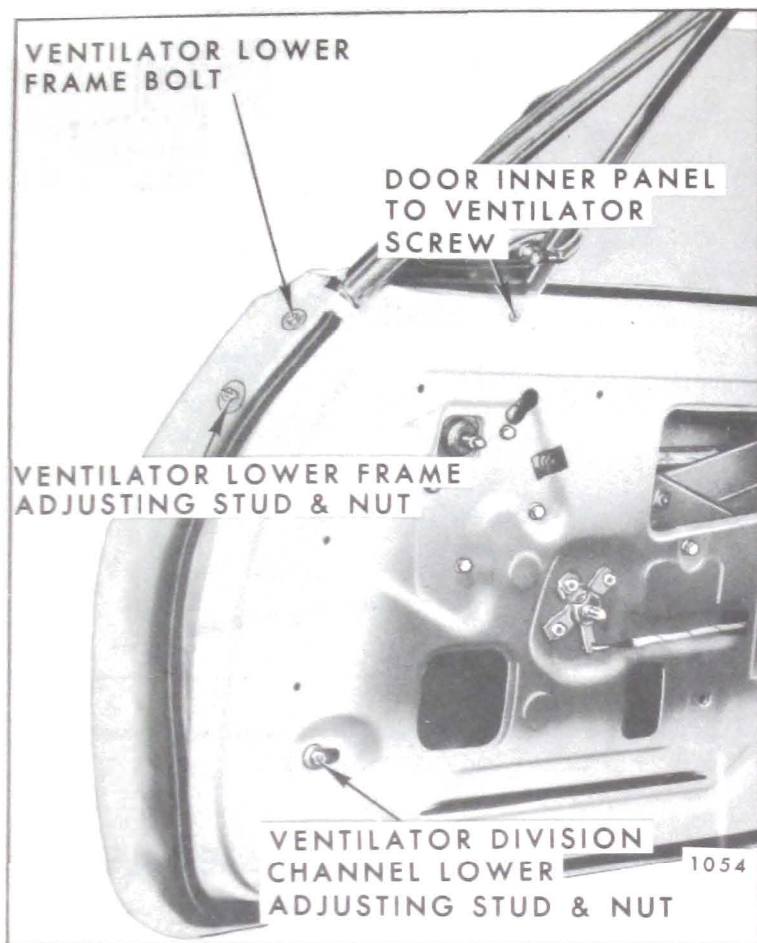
Front Door Ventilator Attachments - "Z" Styles
